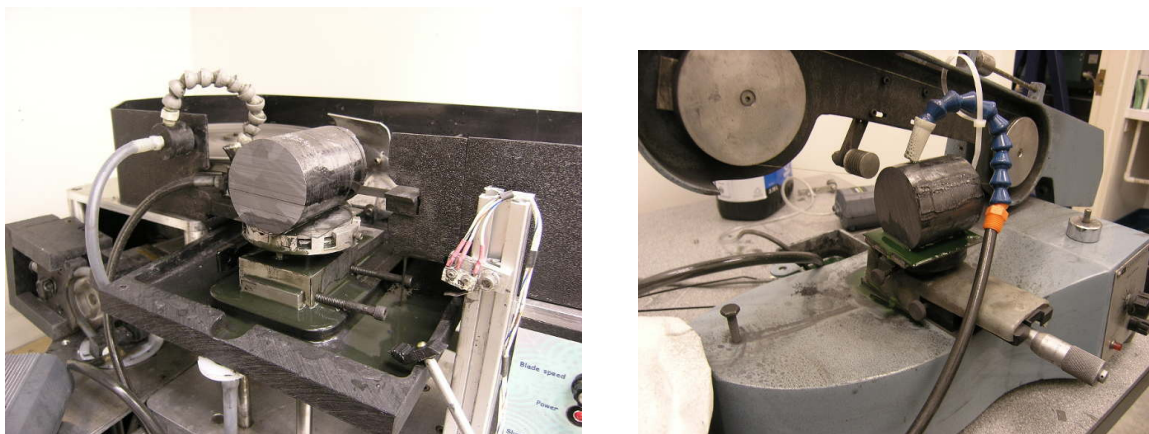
Tape and wire slurry saws used to cut CdTe and CdZnTe samples
